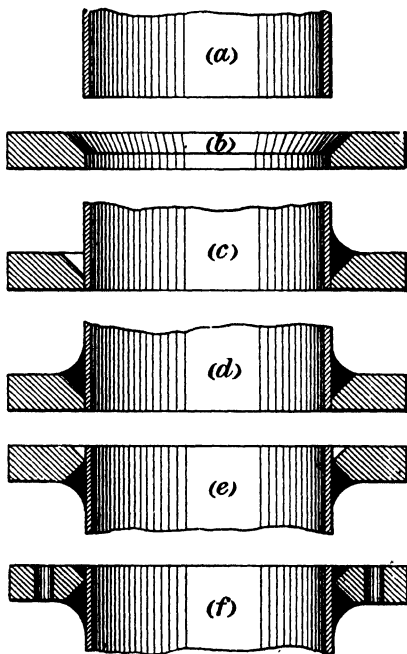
FLANGE WELDING ON STEAM PIPES.
